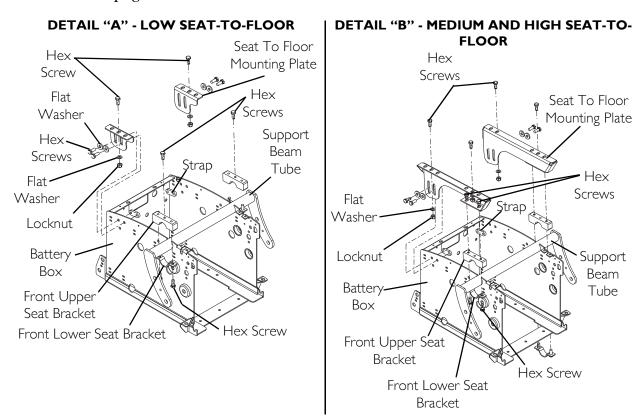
Removing the Existing Seat Frame Mounting Hardware - TDX Wheelchairs
